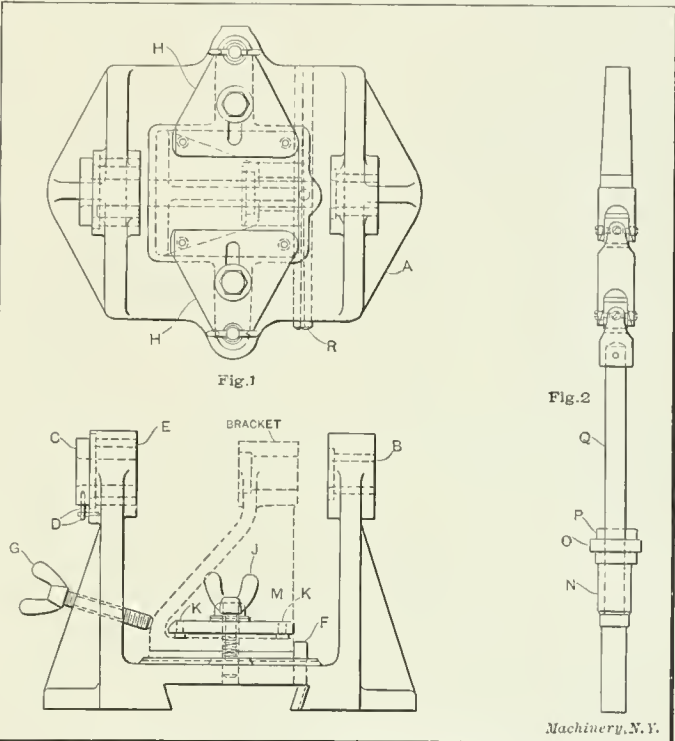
Fixture used on the Lathe for Boring out Brackets. Fig. 2. Boring-bar used in Connection with the Fixture shown in Fig. 1
